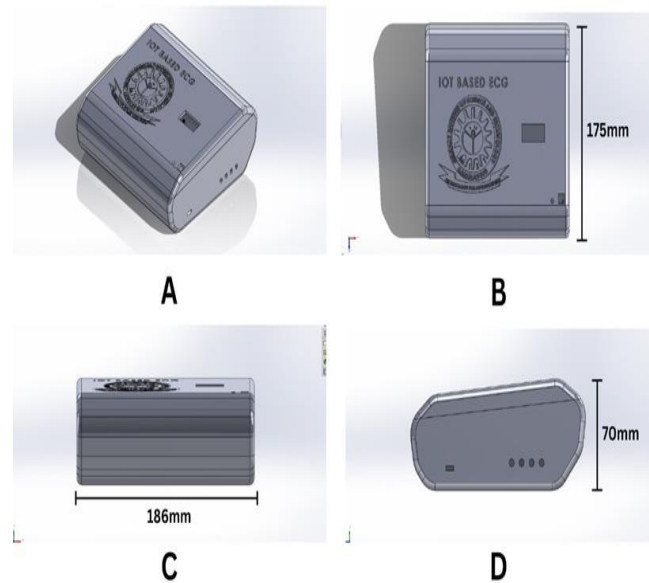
CAD design of the portable enclosure showing (A) isometric, (B) top, (C) front, and (D) side views.
